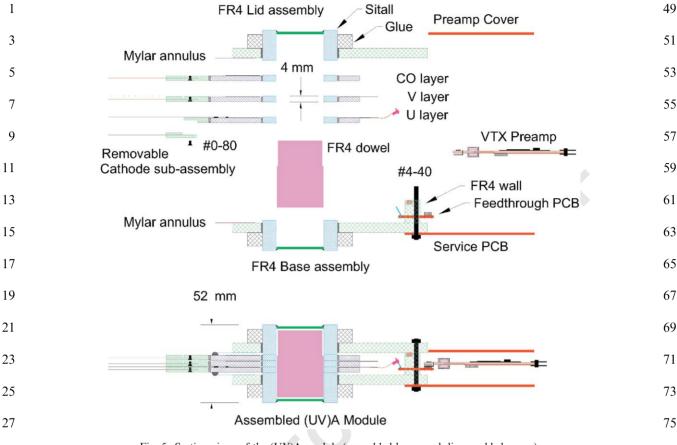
Section views of the (UV)A module (assembled lower and disassembled upper).
